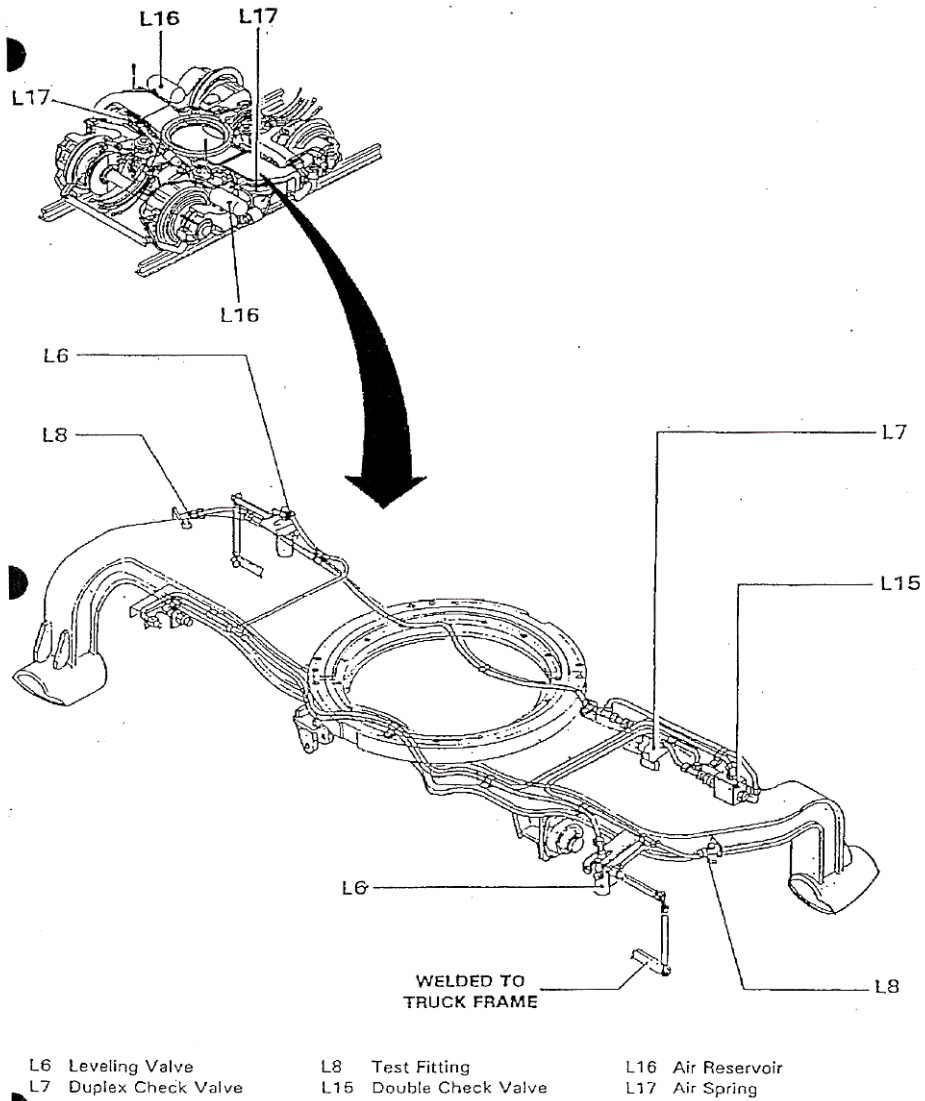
Air Suspension System, "A"/"B" Motor Truck, Components Location
